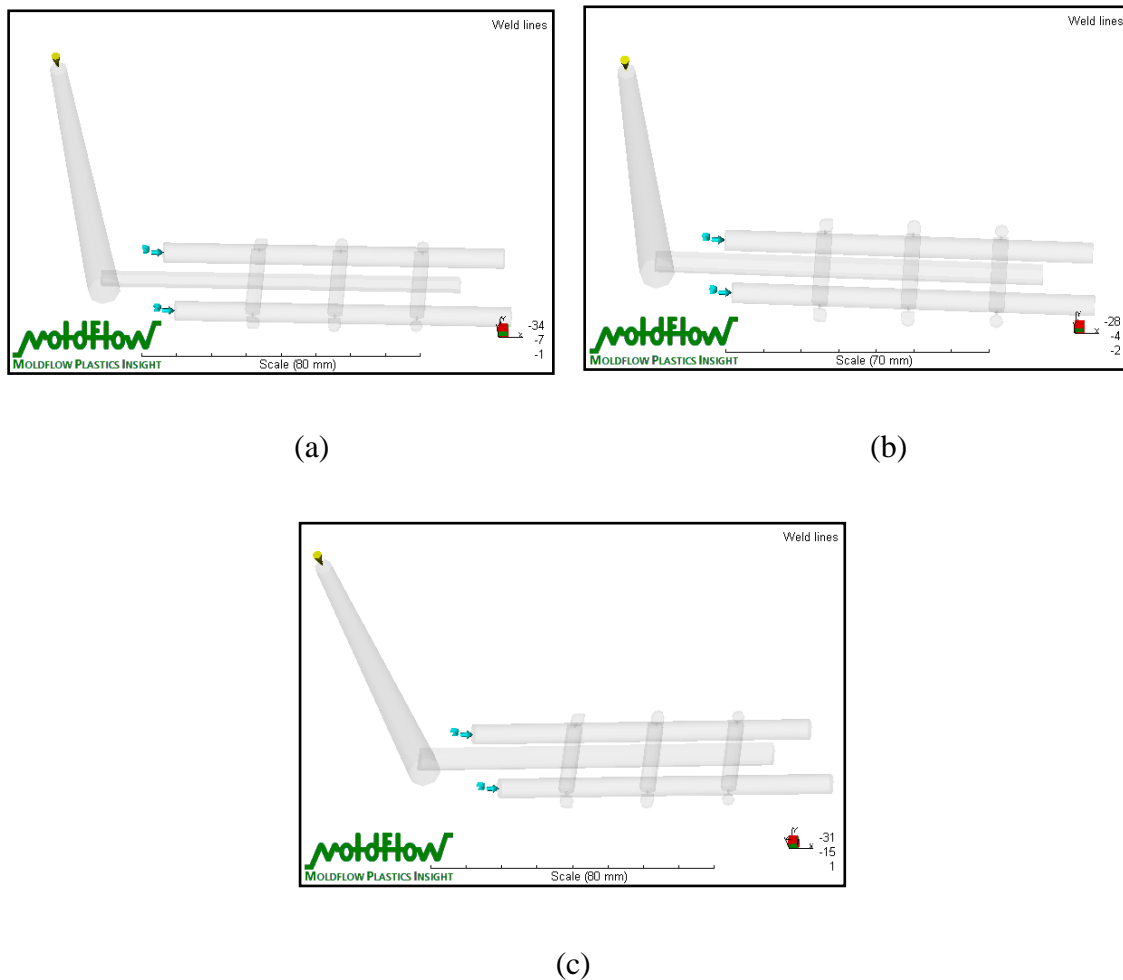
Weld Line of different size of runner (a) 4mm (b) 5mm and (c) 6mm
